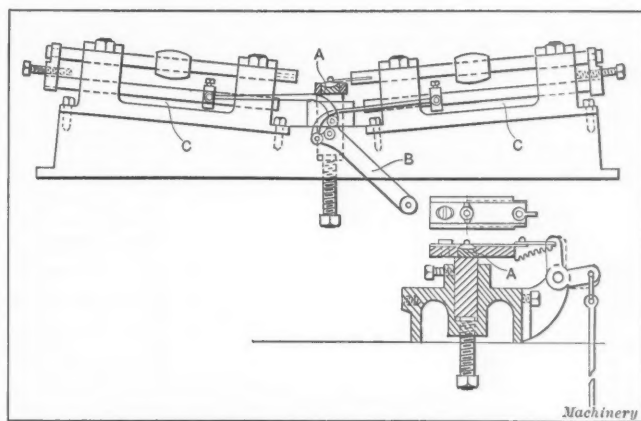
Machine for drilling and counterboring the Shanks of Buttons
